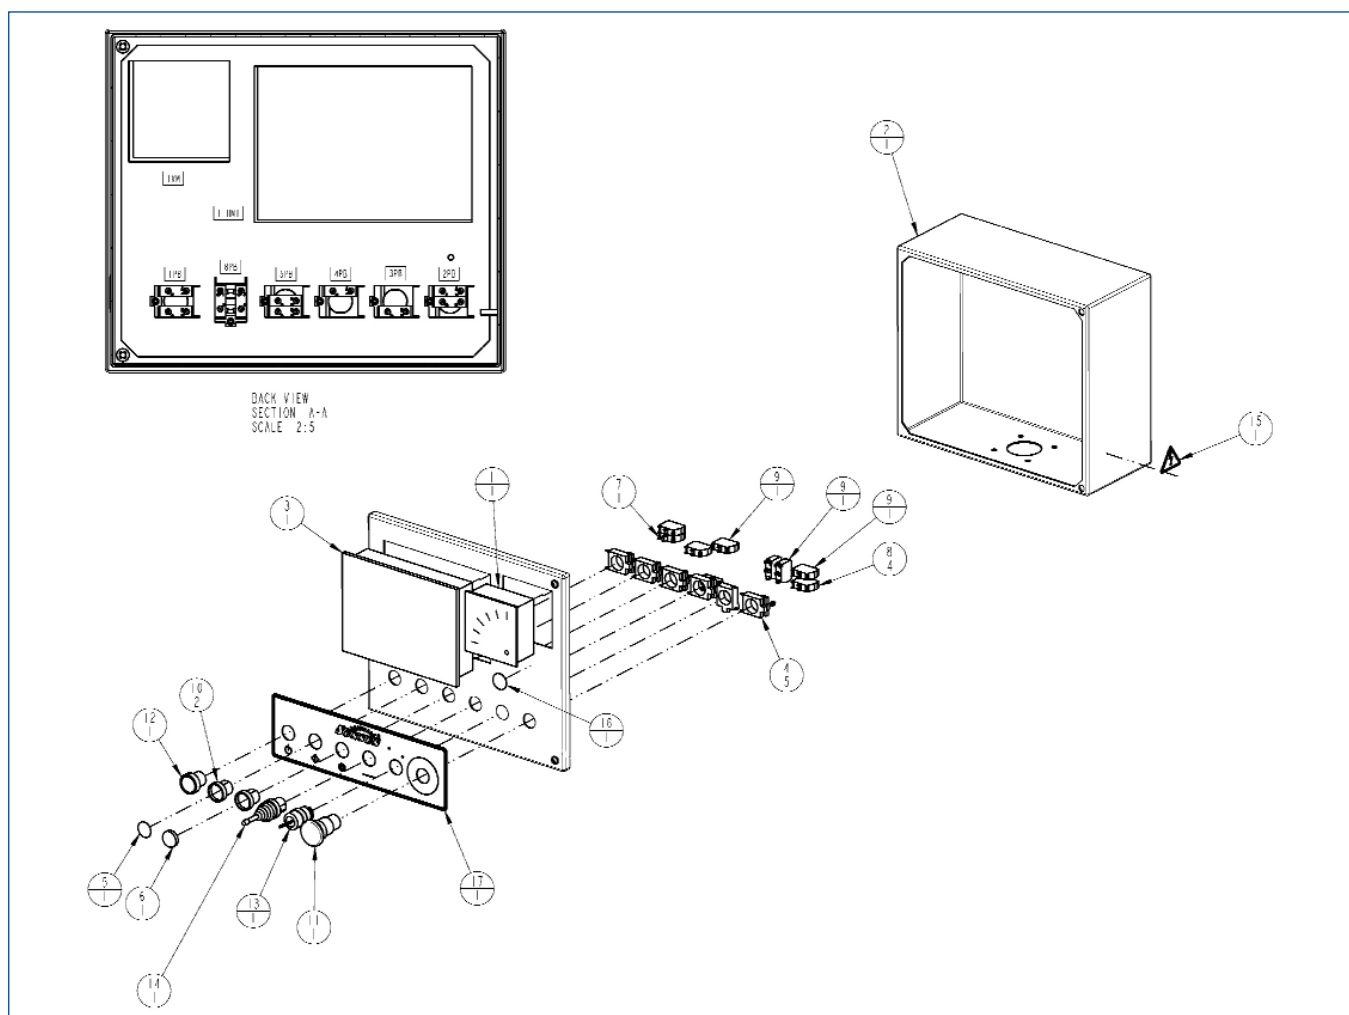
B – OPERATOR BOX ASSEMBLY - CE
